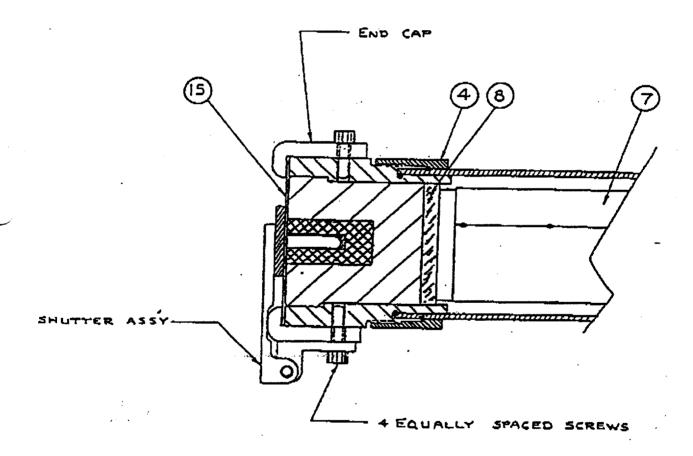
Model 10 X Probe Head Assembly (Drawing 300078)
